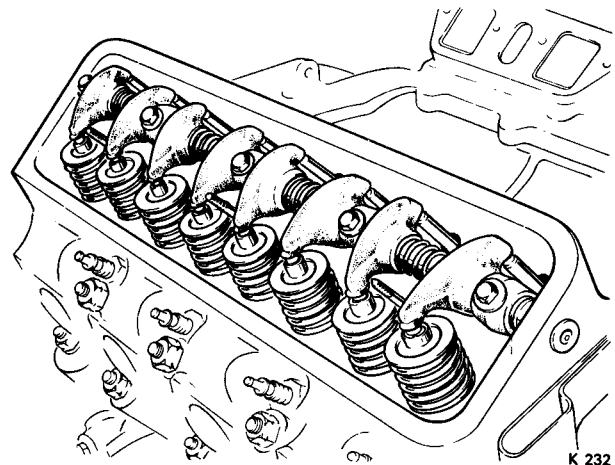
ROCKER SHAFT ASSEMBLY IN POSITION
